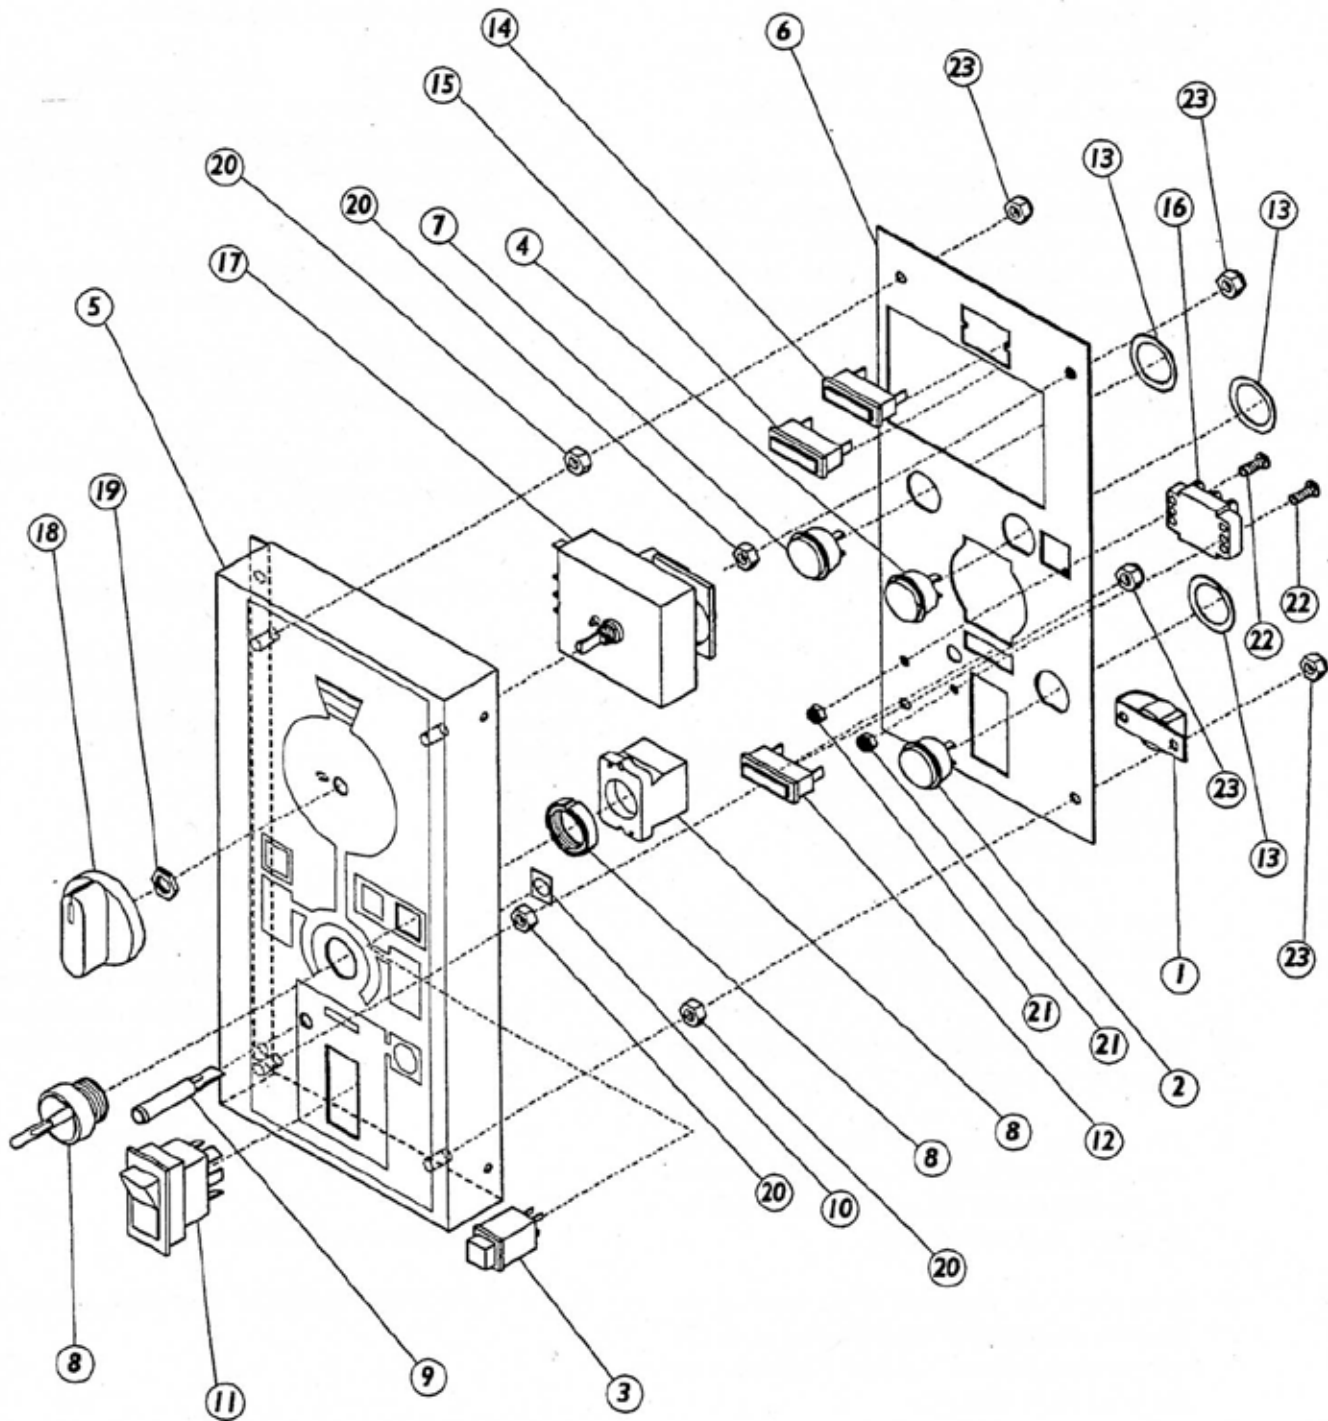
CONTROL PANEL ASSEMBLY
